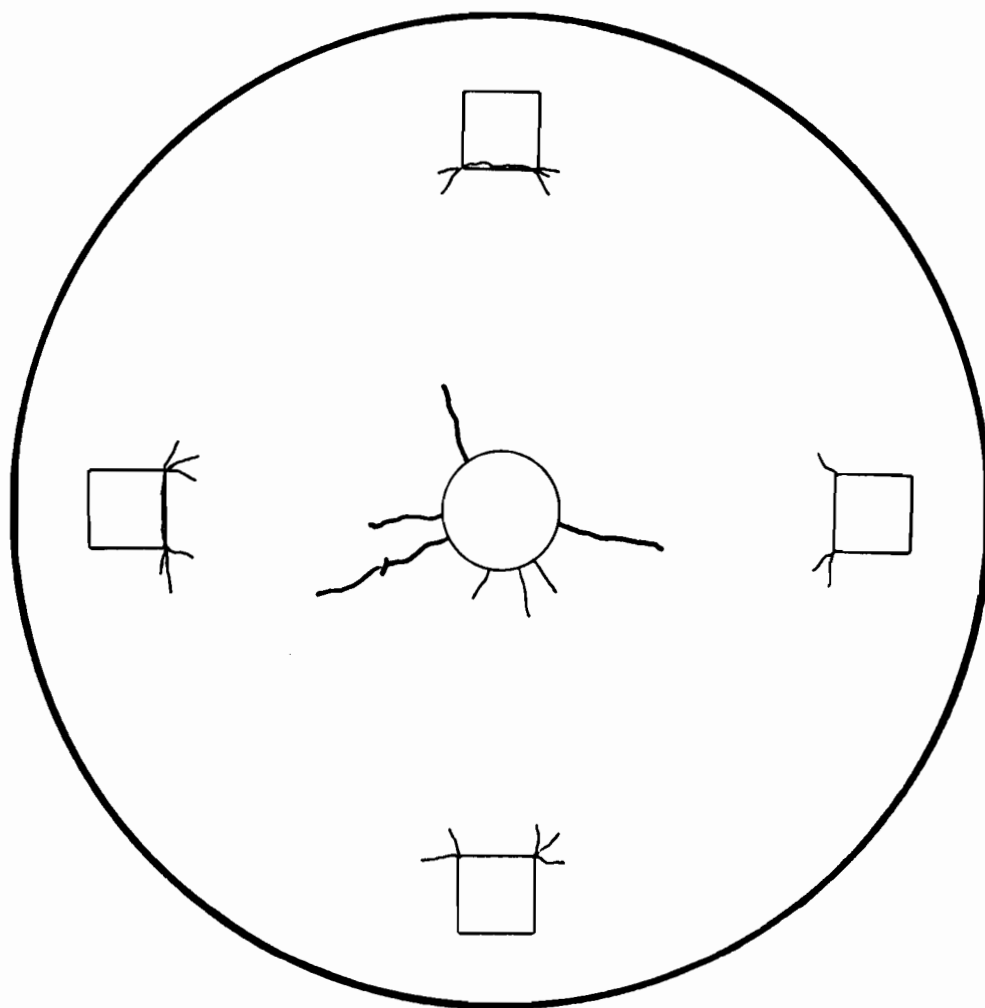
Inside view of the bottom of new model Energite liner showing crack locations after unloading.
